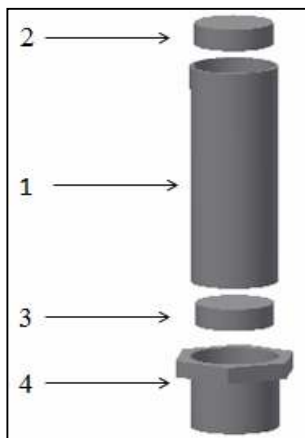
Molding cylinder (1), two blind flanges (2&3) and extruder base (4).
